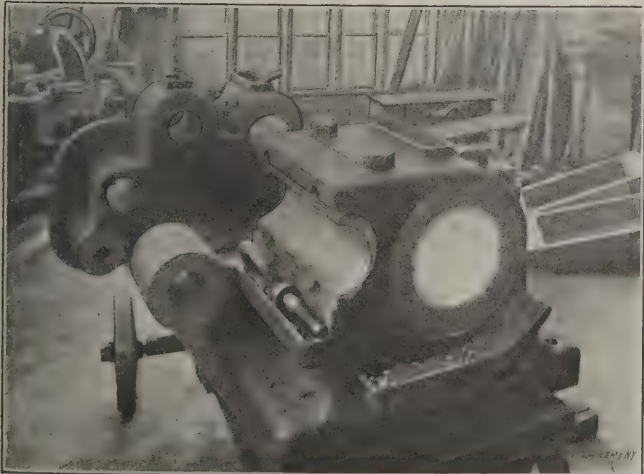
Large Headstock Frame, with Babbitt-lined Bearings. Note Hammered or Peened Appearance of Left-hand Bearing.
